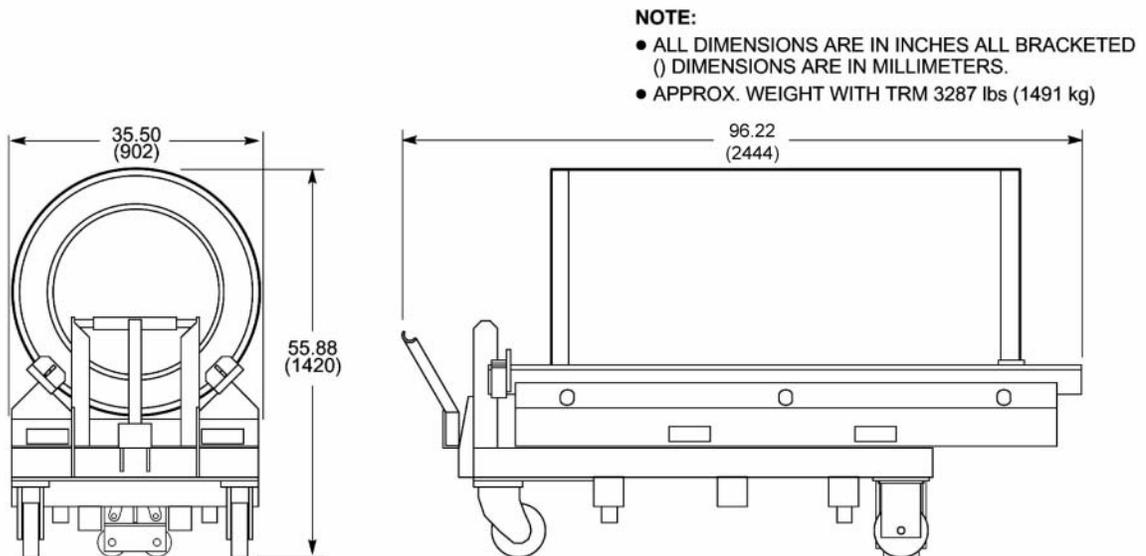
Short Room Replacement BRM Gradient Coil Assembly & Cradle On Cart
